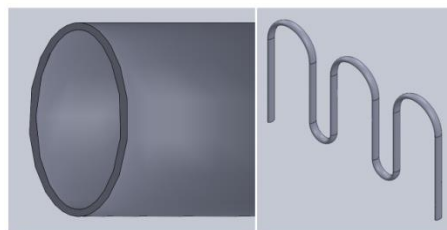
Isometric view and cross section of ellipse(4,2) pipe.
